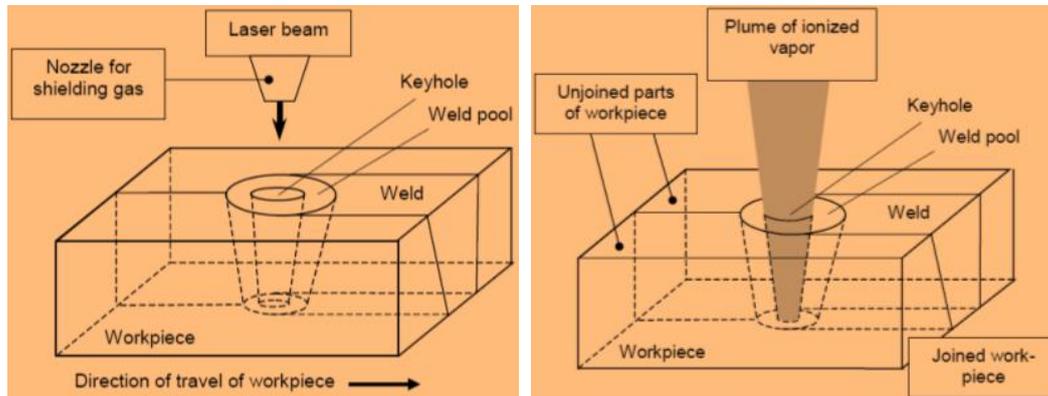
Schematic of the solid, liquid, and vapour regions in laser keyhole welding
